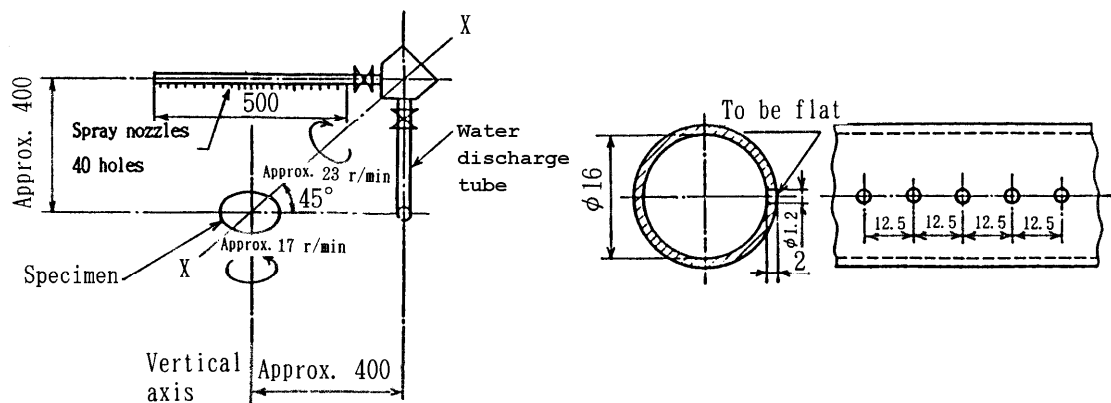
Spray Nozzles (Nozzle shape and dimensions) (Unit: mm)
